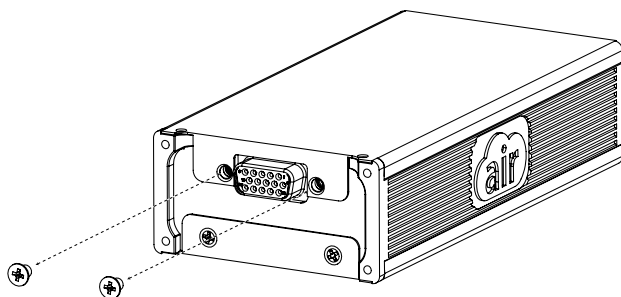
Screws on connector 2. Never remove these screws without proper replacement!
